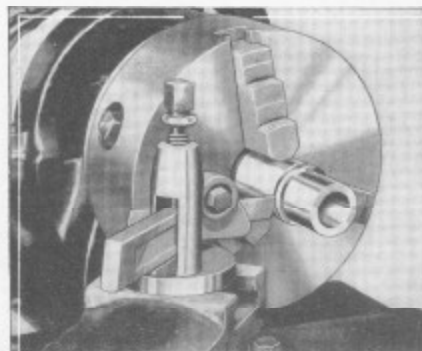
Cutting-off a Bushing, made complete, in one set-up, in Chuck.
